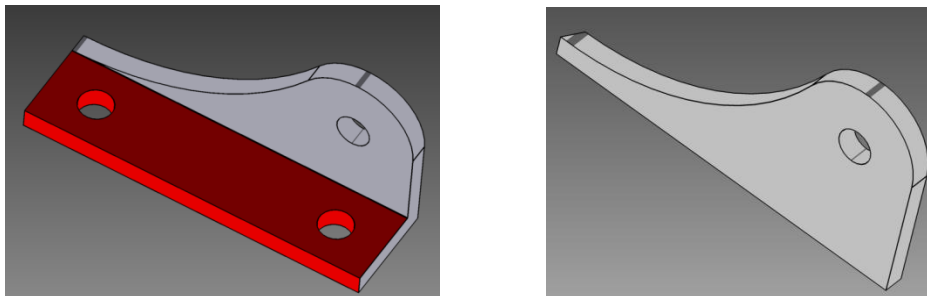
Leg designed for screw-nut union and the leg for welding.
